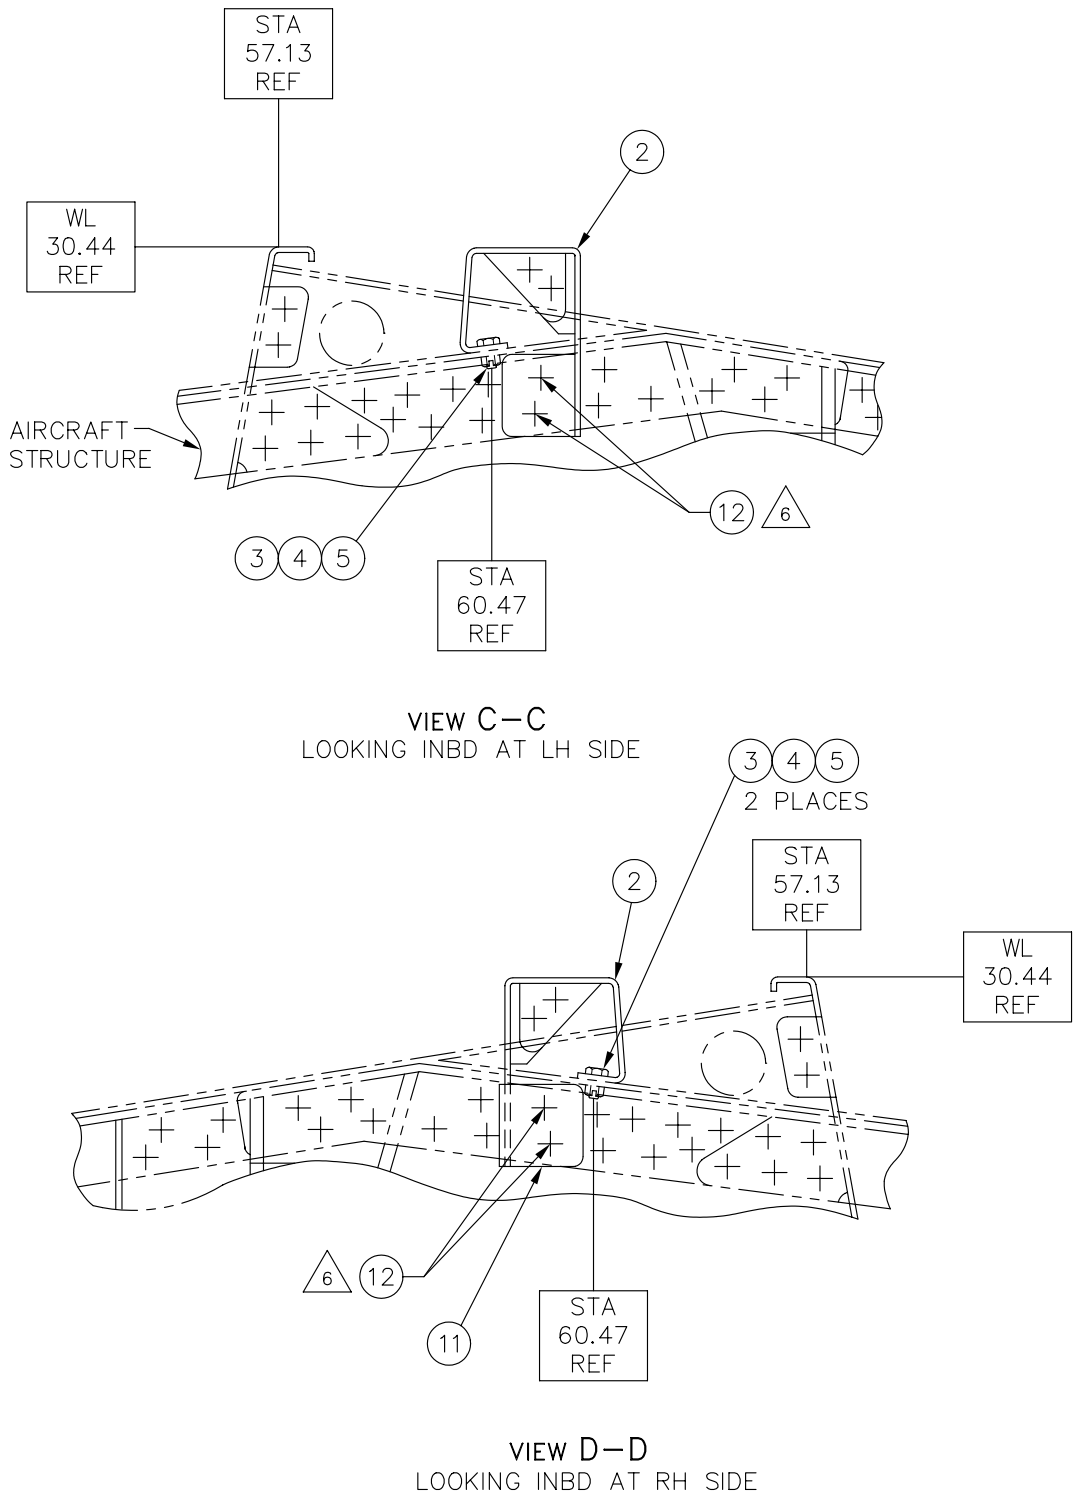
Installation of new support (407-070-921-103) (Sheet 3)
